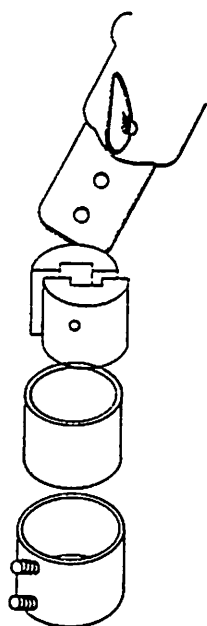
Exploded view of probe holder which allows for rotational movement of ultrasound transducer. It is made of three cylinders.
